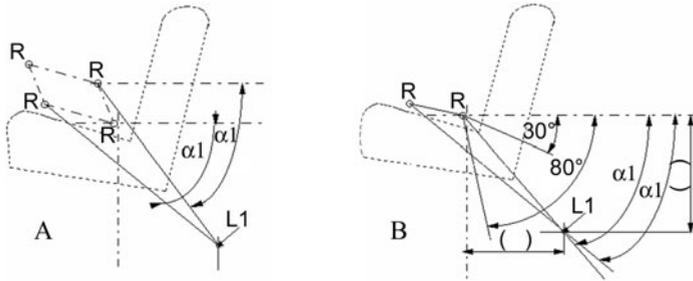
A: determination of point L1 with α_1 not constant, bracket anchored to the side frame, seats with the height adjustment; B: determination of point L1 with α_1 not constant, bracket anchored to the side frame.
